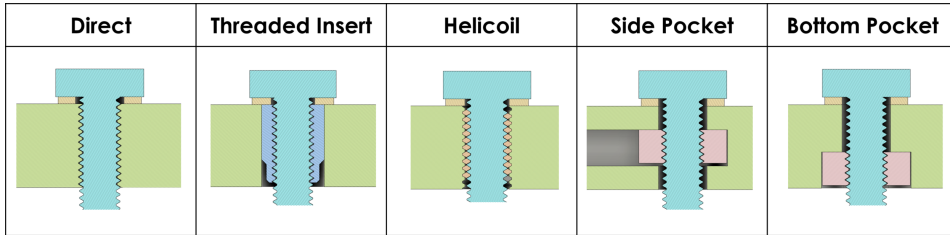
Illustration of helicoils, threaded inserts and embedded nuts[39]
